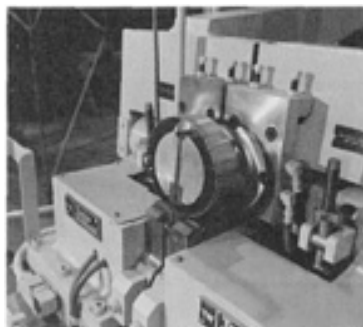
FLASH-WELDING MACHINE USED TO FABRICATE A COILED STEEL STRIP INTO A SMALL-DIAMETER RING WITH A FLANGE
